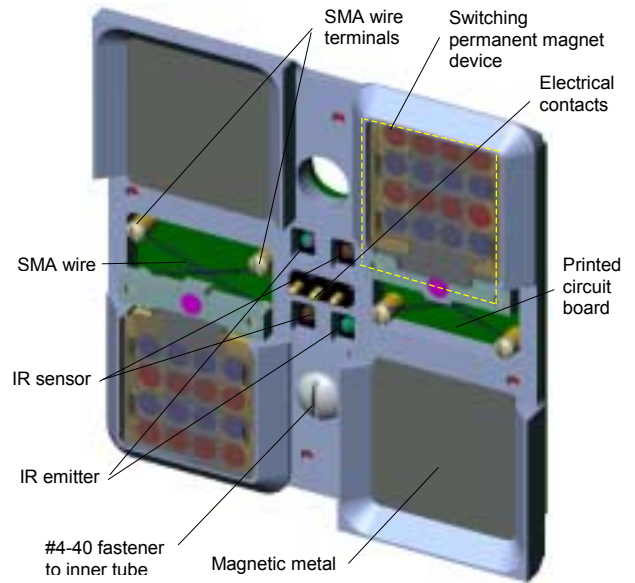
CAD solid model of Connection Plate (right) with switching permanent magnet devices, IR sensors and transmitter, electrical contacts, and printed circuit board.
